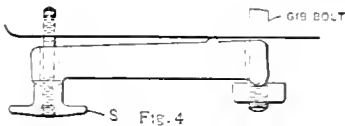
Method of Fastening Rapid-traverse Driving Pulley on Motor Shaft. Fig. 4. Device for Clamping the Head without a Wrench. Fig. 5. Trunnion with Handle for Shifting the Feed Gears
